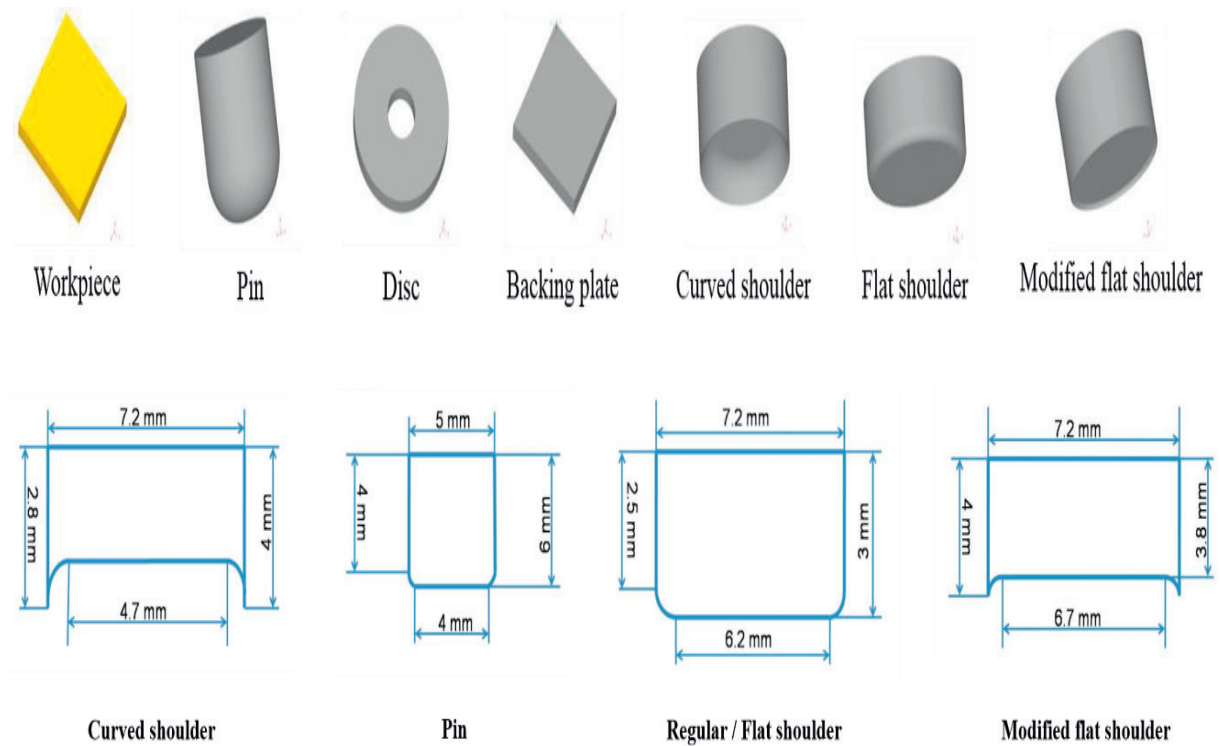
Components used in modeling of filling FSSW and main components with dimensions
